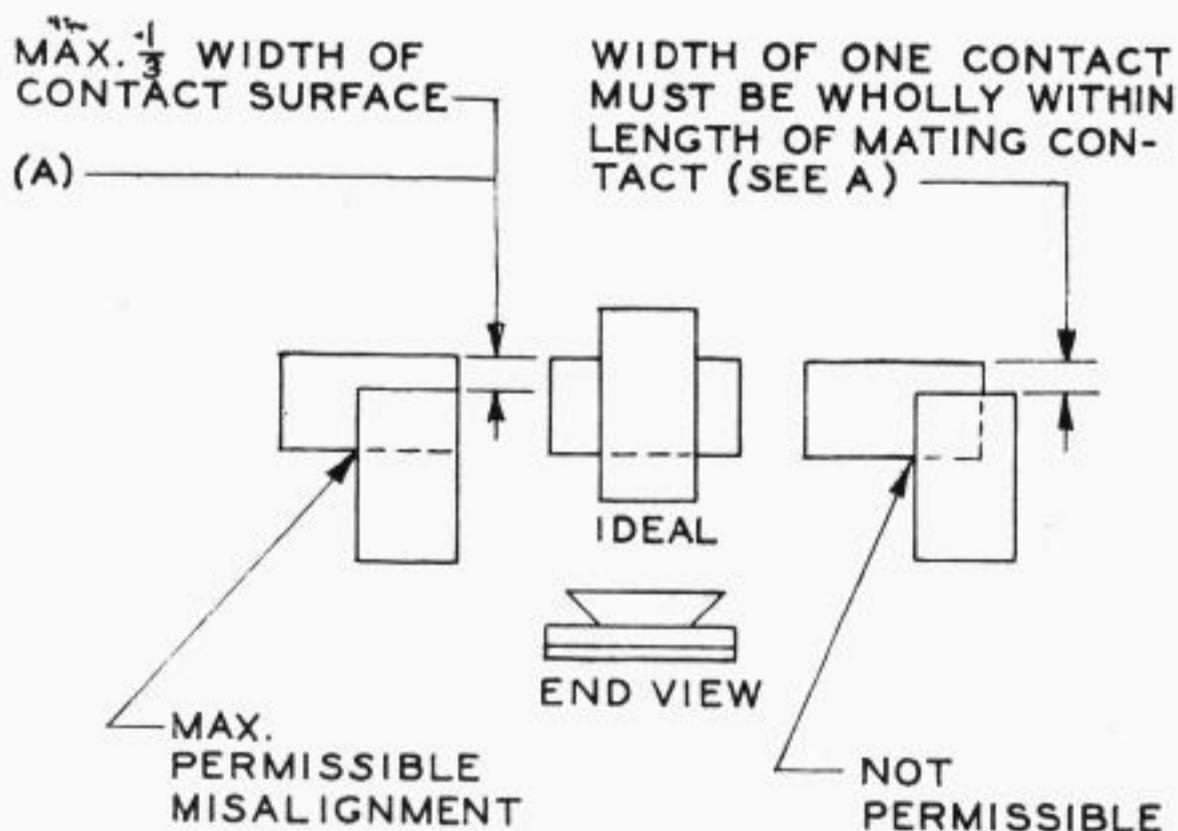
ALIGNMENT OF HEAVY CONTACTS -
